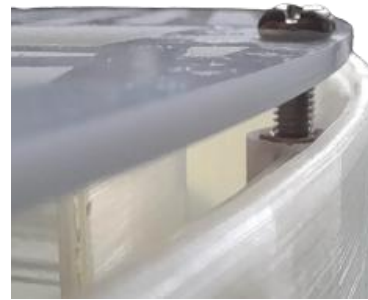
Nut securing the Base Housing Cover on to the Base Housing
